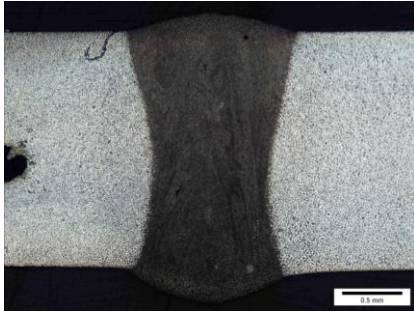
Solidification Cracks in the Sample Welded at 3.75 kW – Start Section / Part -1
